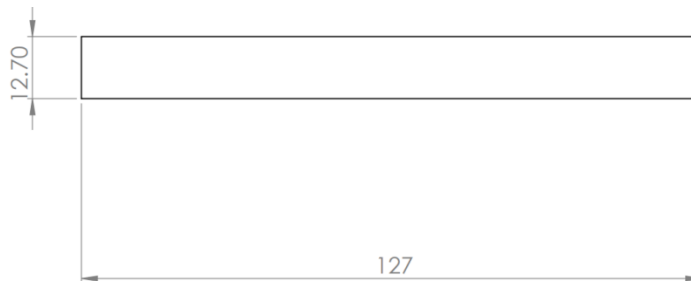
Dimensions of the three point bending coupons as per ASTM D790.
